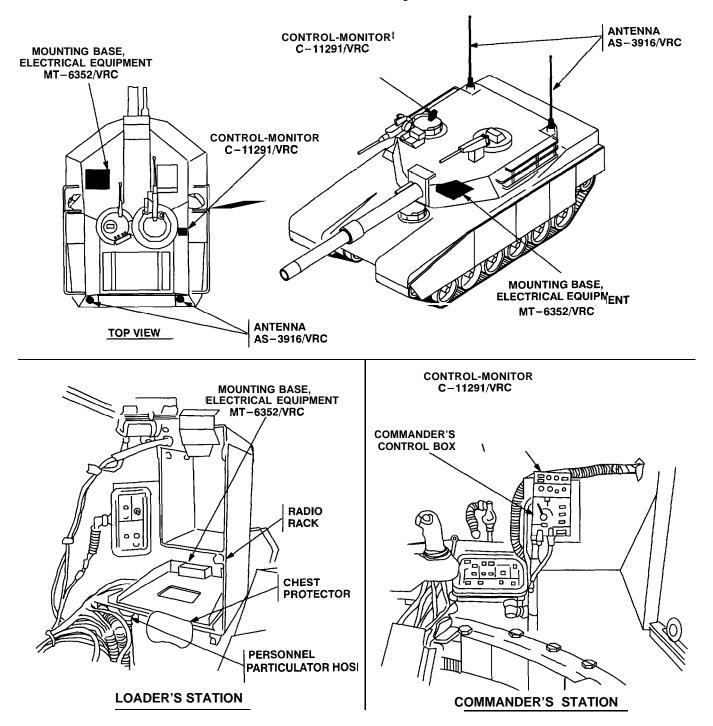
(1). MK and Radio Installation: MK Equipment Locations
